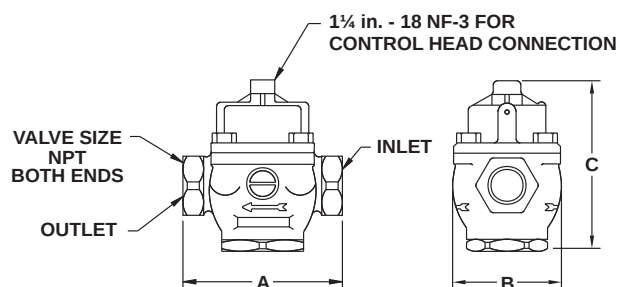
1/2 in. Thru 2 in. Stop (Direction) Valves
